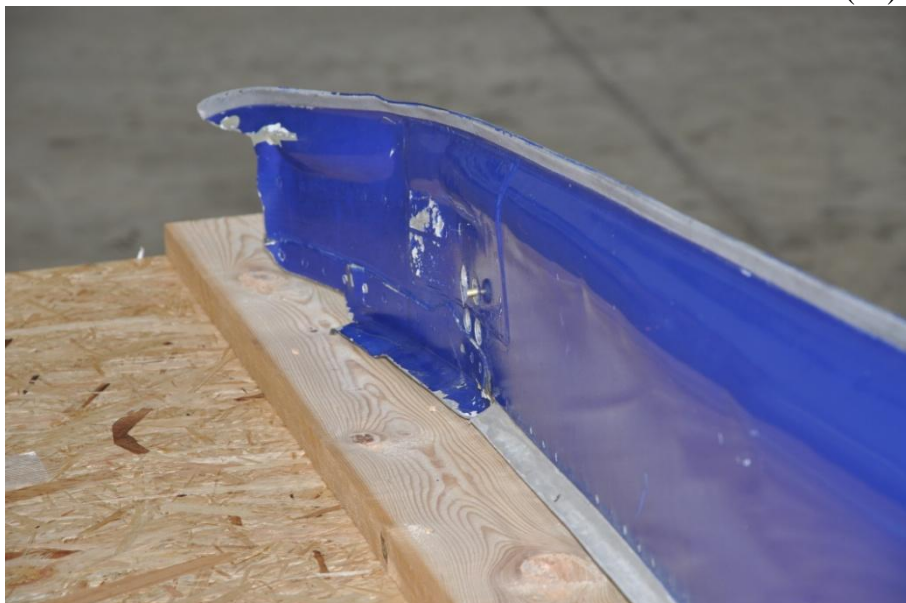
The rear end of the fairing showing bending, buckling and a tear failure.
